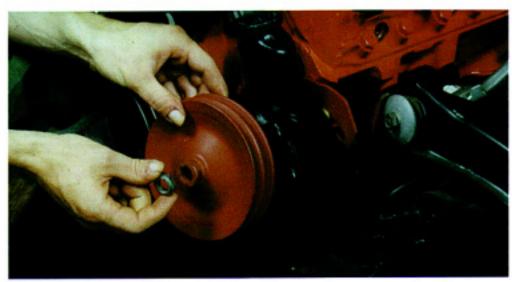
Step 16. Install the pulley on the power steering pump. Make sure that the Woodruff key is positioned on the pump shaft before installing the pulley. Check the alignment of the pulleys with respect to each other. The tracks need to be lined up. Select the pump belt that you will use. The length of this belt is critical. The amount of adjustment is minimal. The belt has to be long enough to be installed, but not so long that it is impossible to tighten. (I used a flat-blade screwdriver to "pry" the belt into position.) This belt will be installed later.
